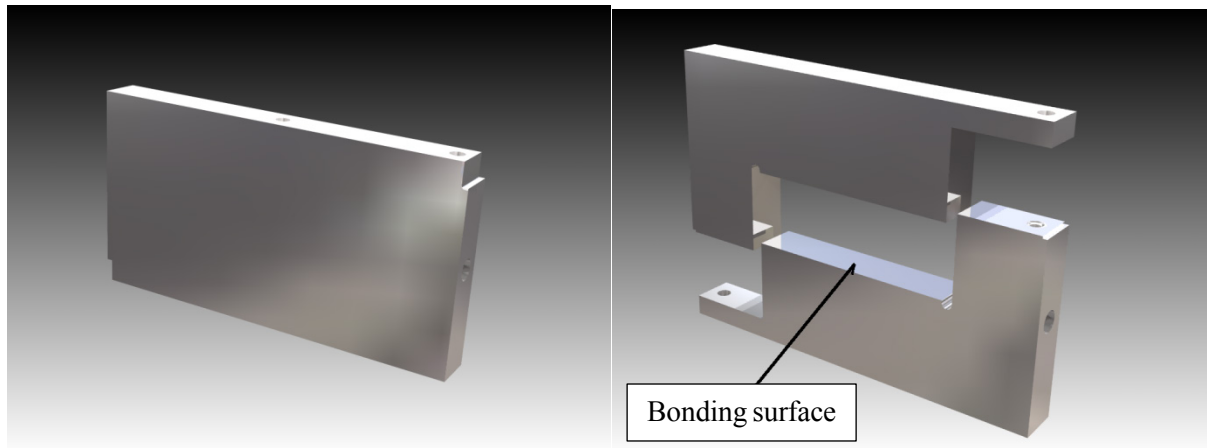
AlMg3 sample blank before (left) and after spark erosion machining (right) [1]
